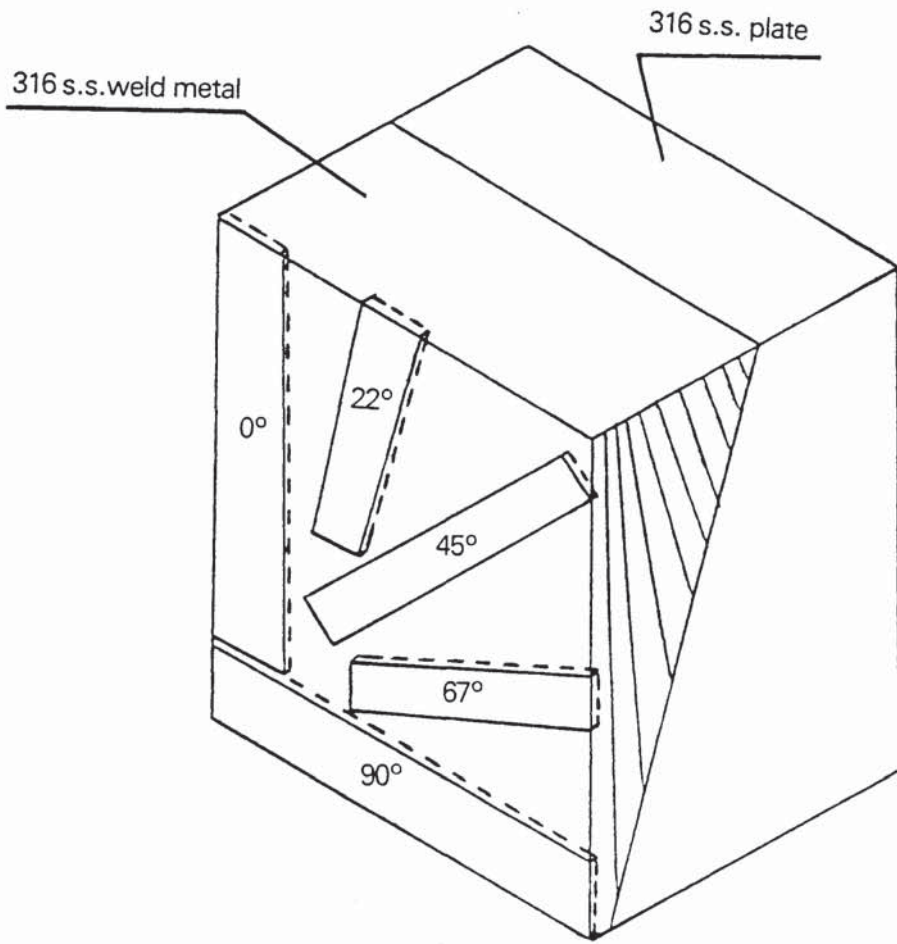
Position of strips (resonators) cut out from the 316 single-V austenitic weld in relation to the weld metal
